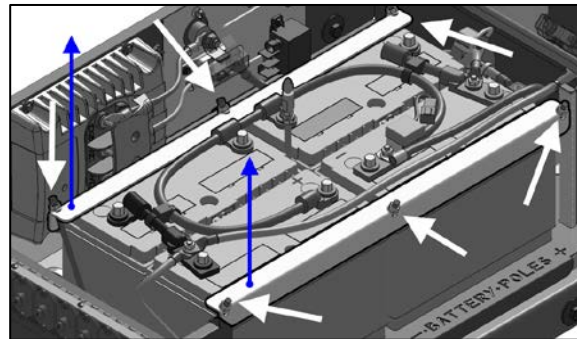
BATTERY HOLDING BRACKET REMOVAL
